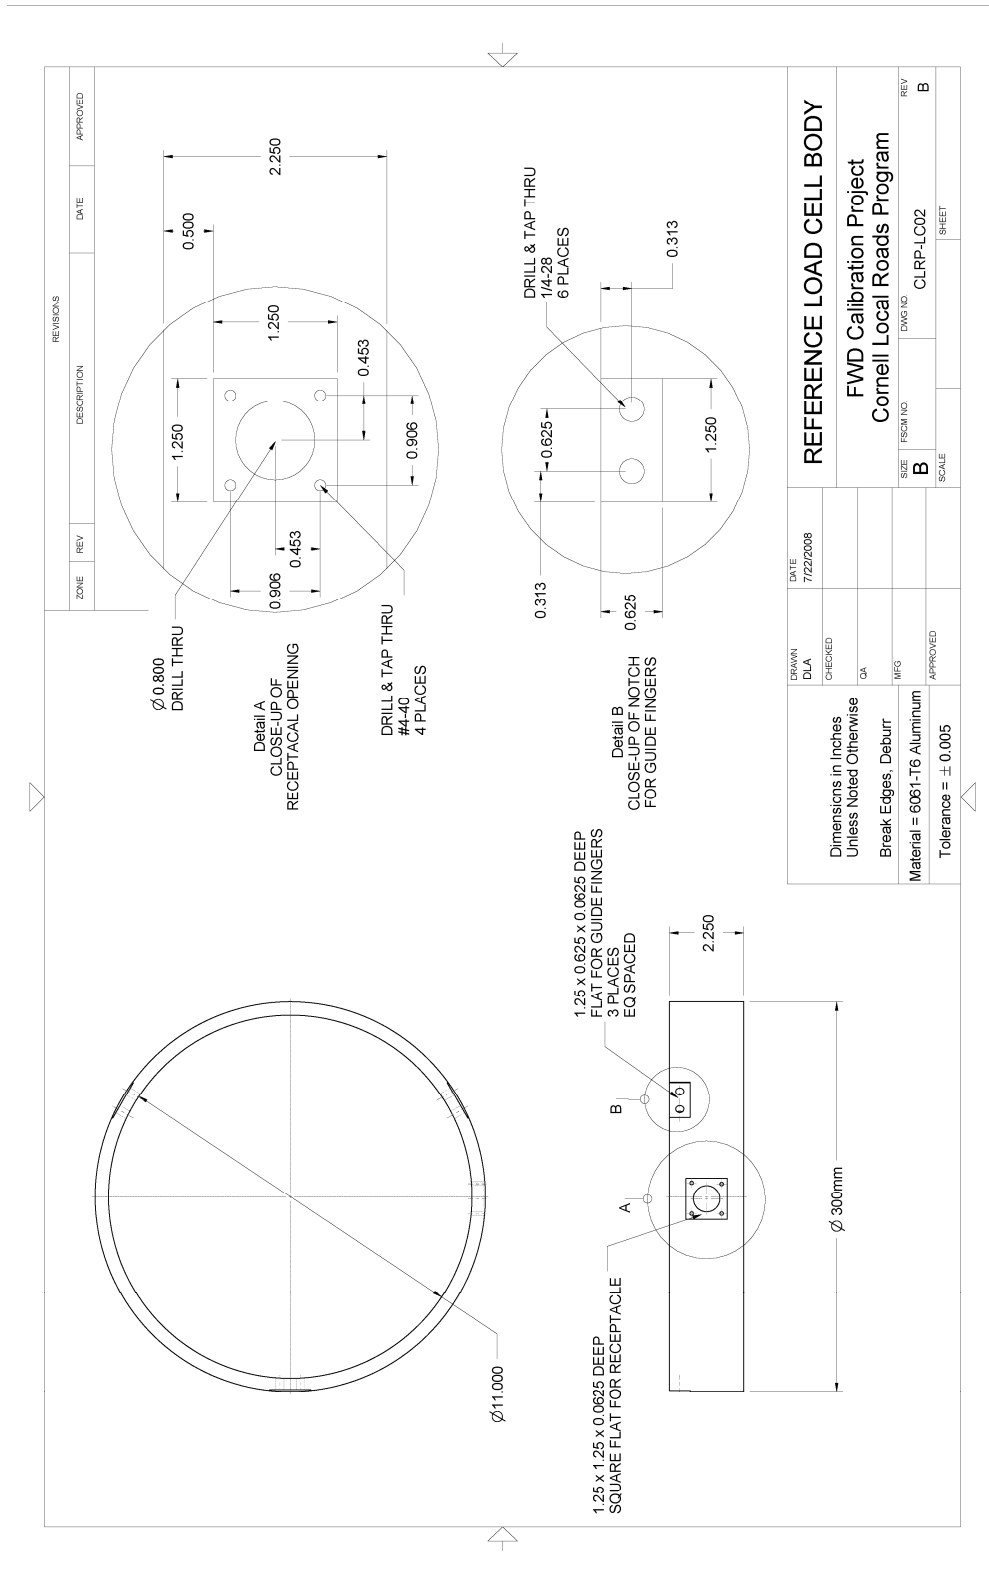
Drawing. CLRP-LC02 Load Cell Body.
